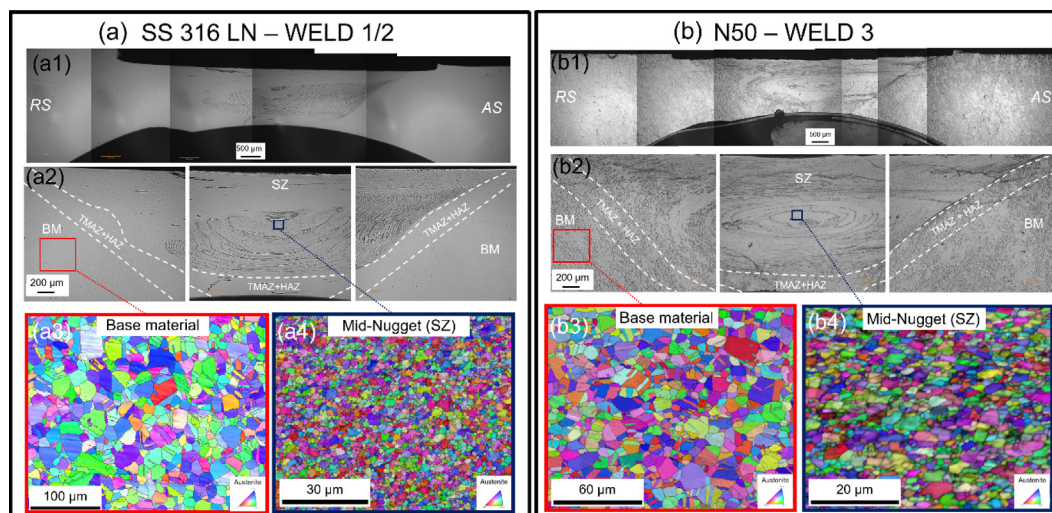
Macro and micrographs of welds 1–3 with representing the SS 316 LN welded jacket (a, b) and the N50 welded jacket (c, d).
